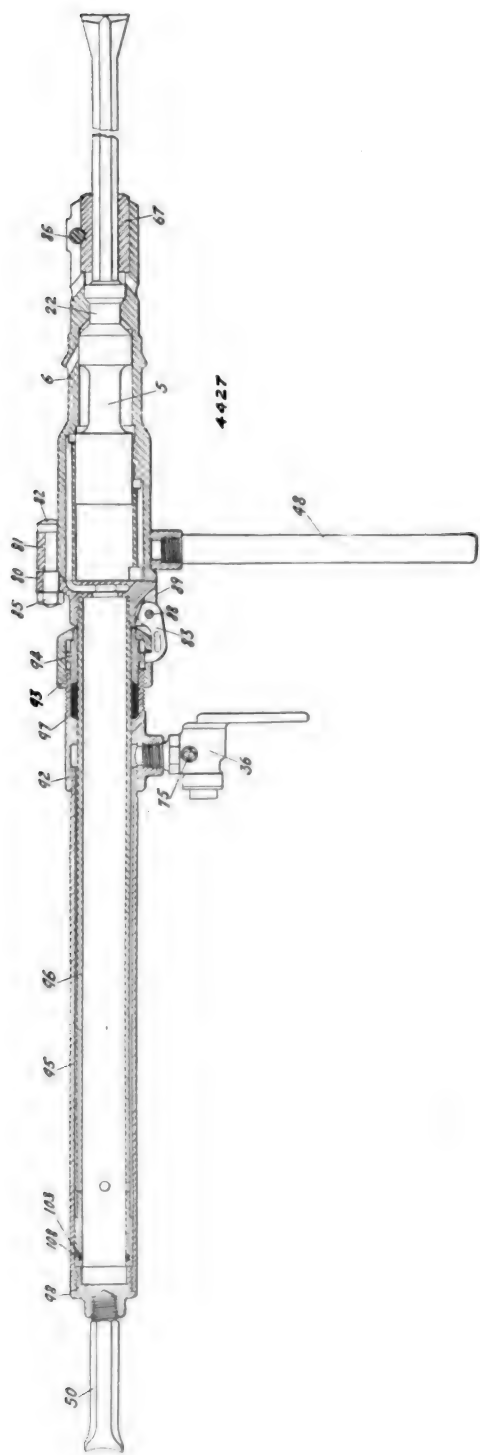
Ingersoll-Rand "Imperial" Hammer Drill, Type M C-12.
